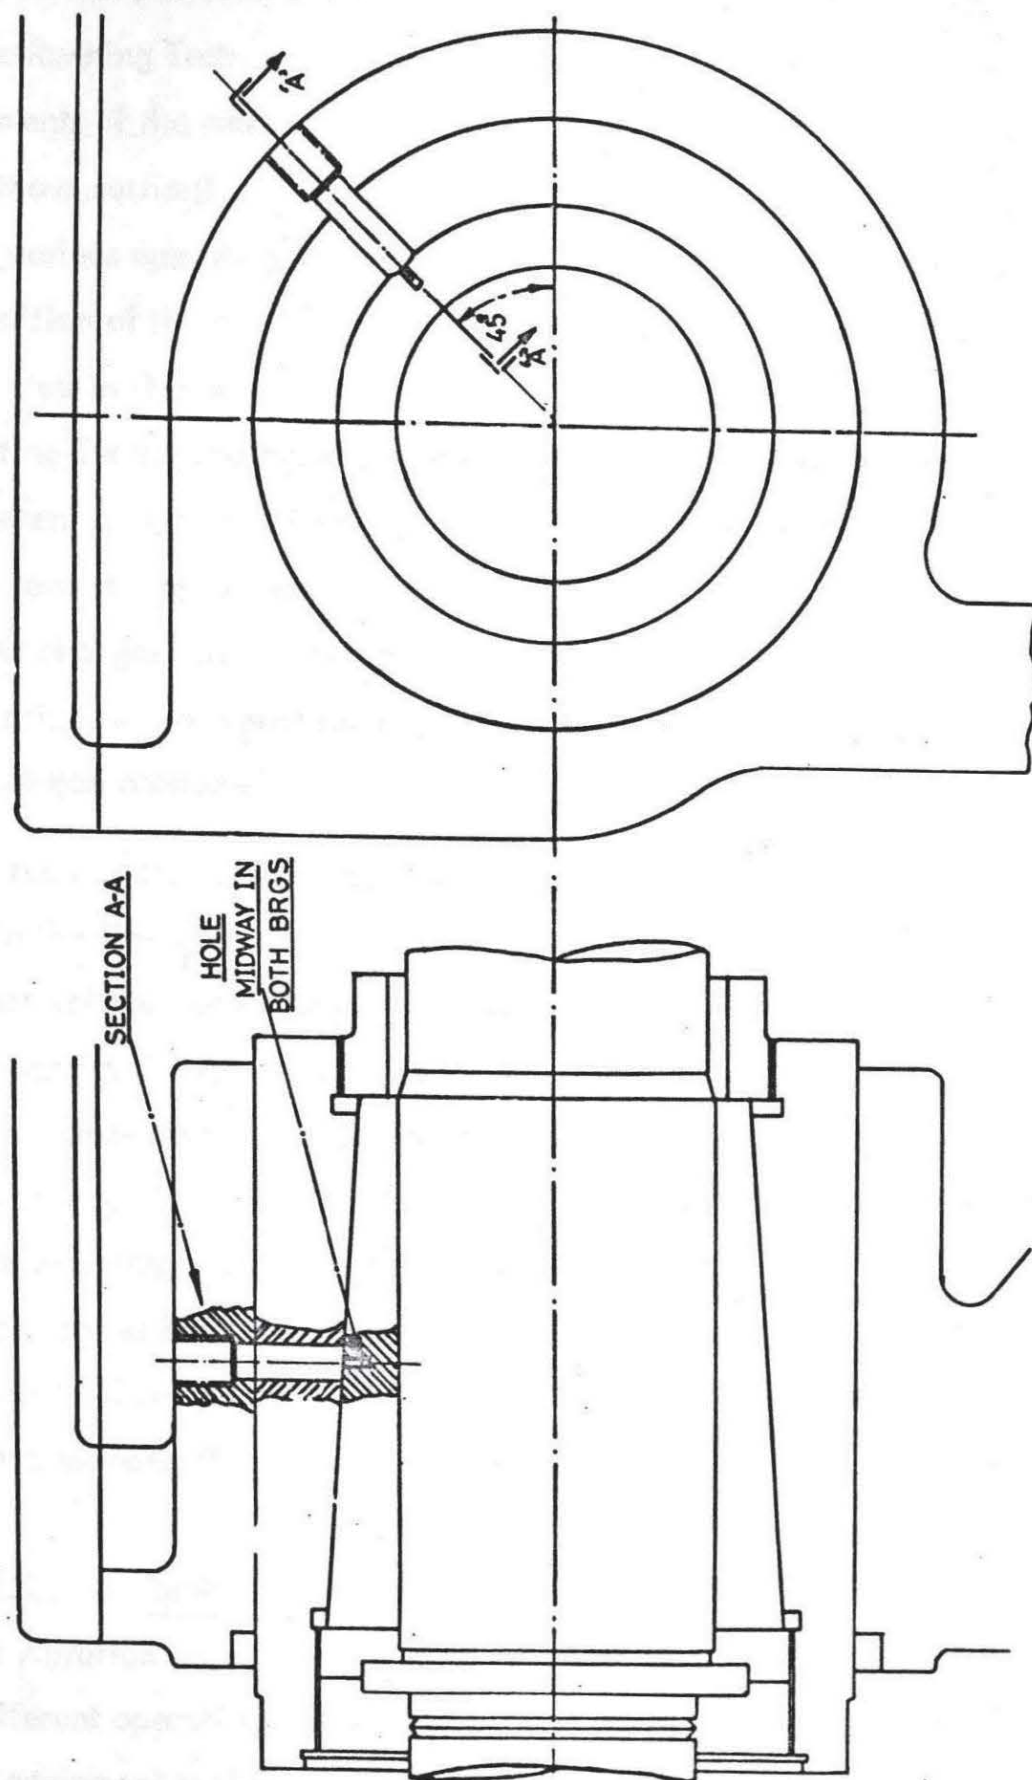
LOCATION OF THERMOCOUPLES INSIDE THE WHEELHEAD BEARINGS.
